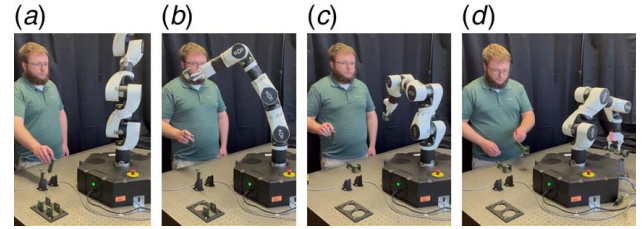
(a) Person retrieves the connecting rod, (b) robot moves piston to the fixture, (c) robot lowers piston into fixture, and (d) robot moves crankshaft to shared workspace while human removes assembly from fixture
